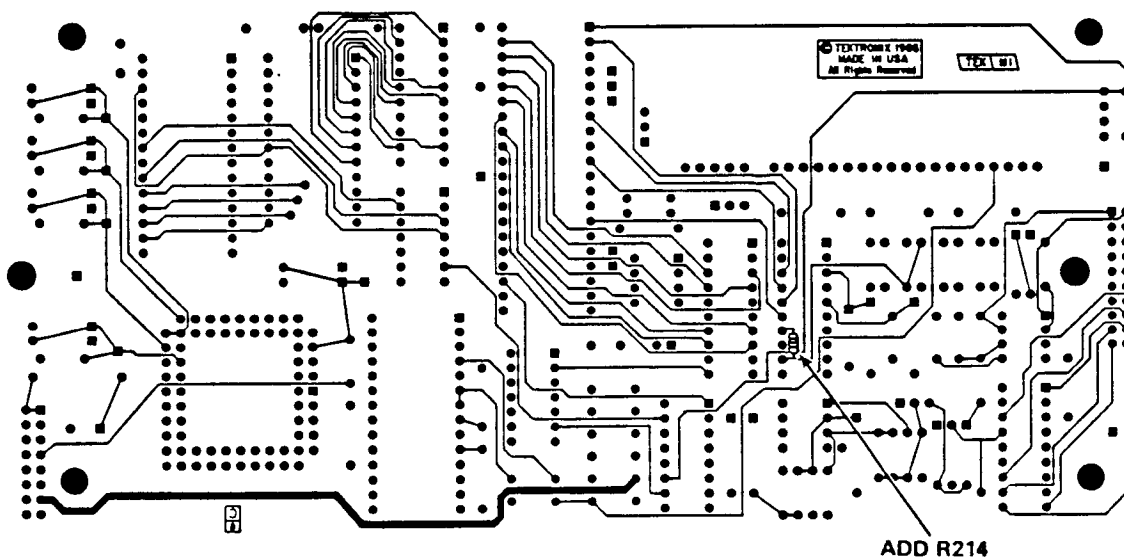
Backside (solder) side of the Kernel ckt bd.
